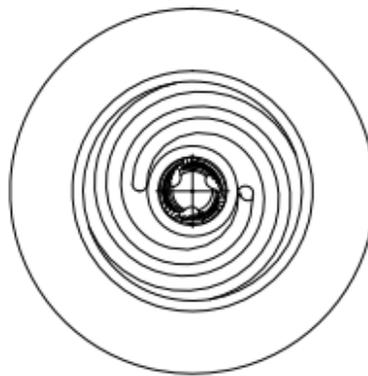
MegaStir FSW tool with scrolled shoulder.^[12]
